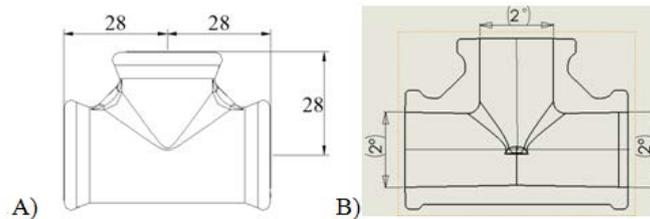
A) TS 11 1/2» Te dimensions, B) Aluminum Te designs with 2° angled inner core design.
